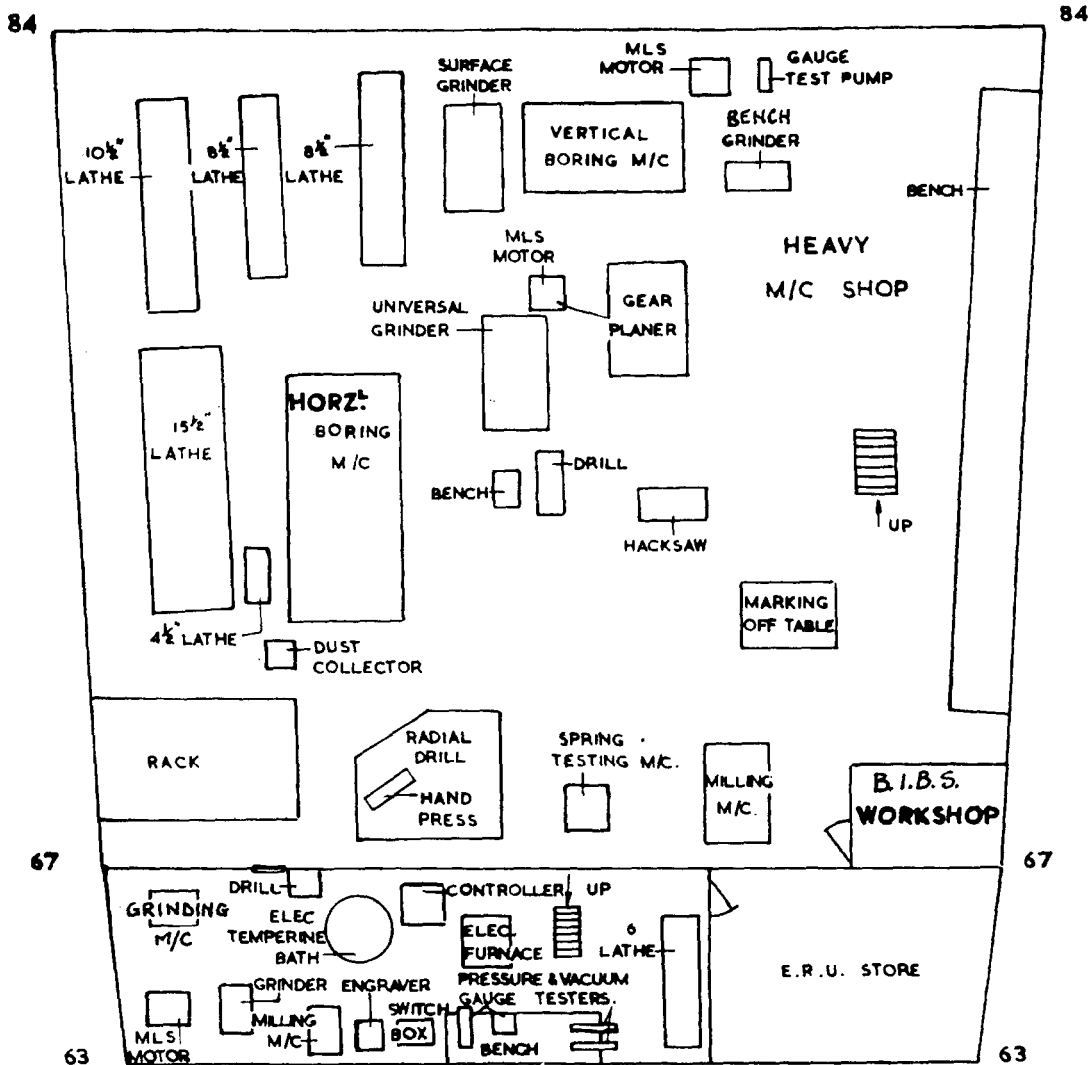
PLAN OF HEAVY MACHINE SHOP, TOOL ROOM AND ENGINEERS READY USE STORE
